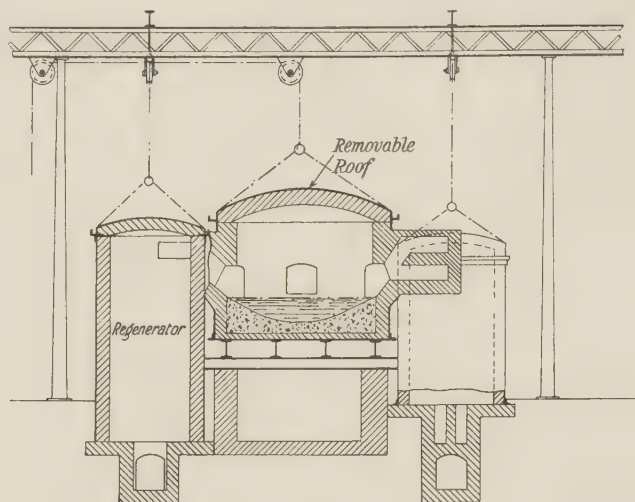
Dick and Riley's Removable Furnace Roof.
